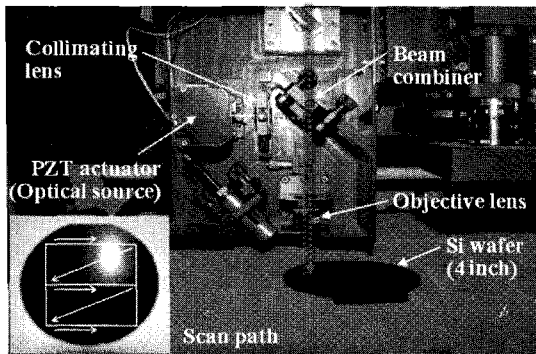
Auto-focusing module installed to laser micro-machining platform
